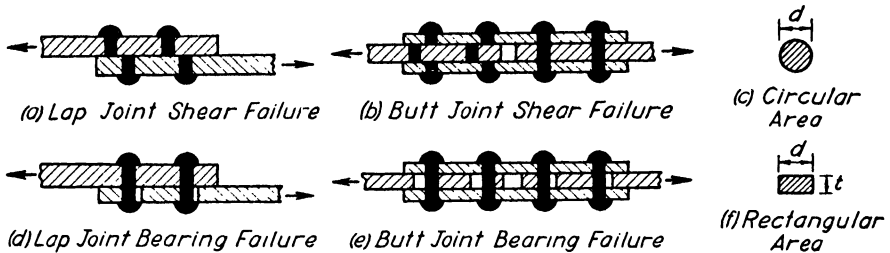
FAILURES OF LAP AND BUTT JOINTS.
